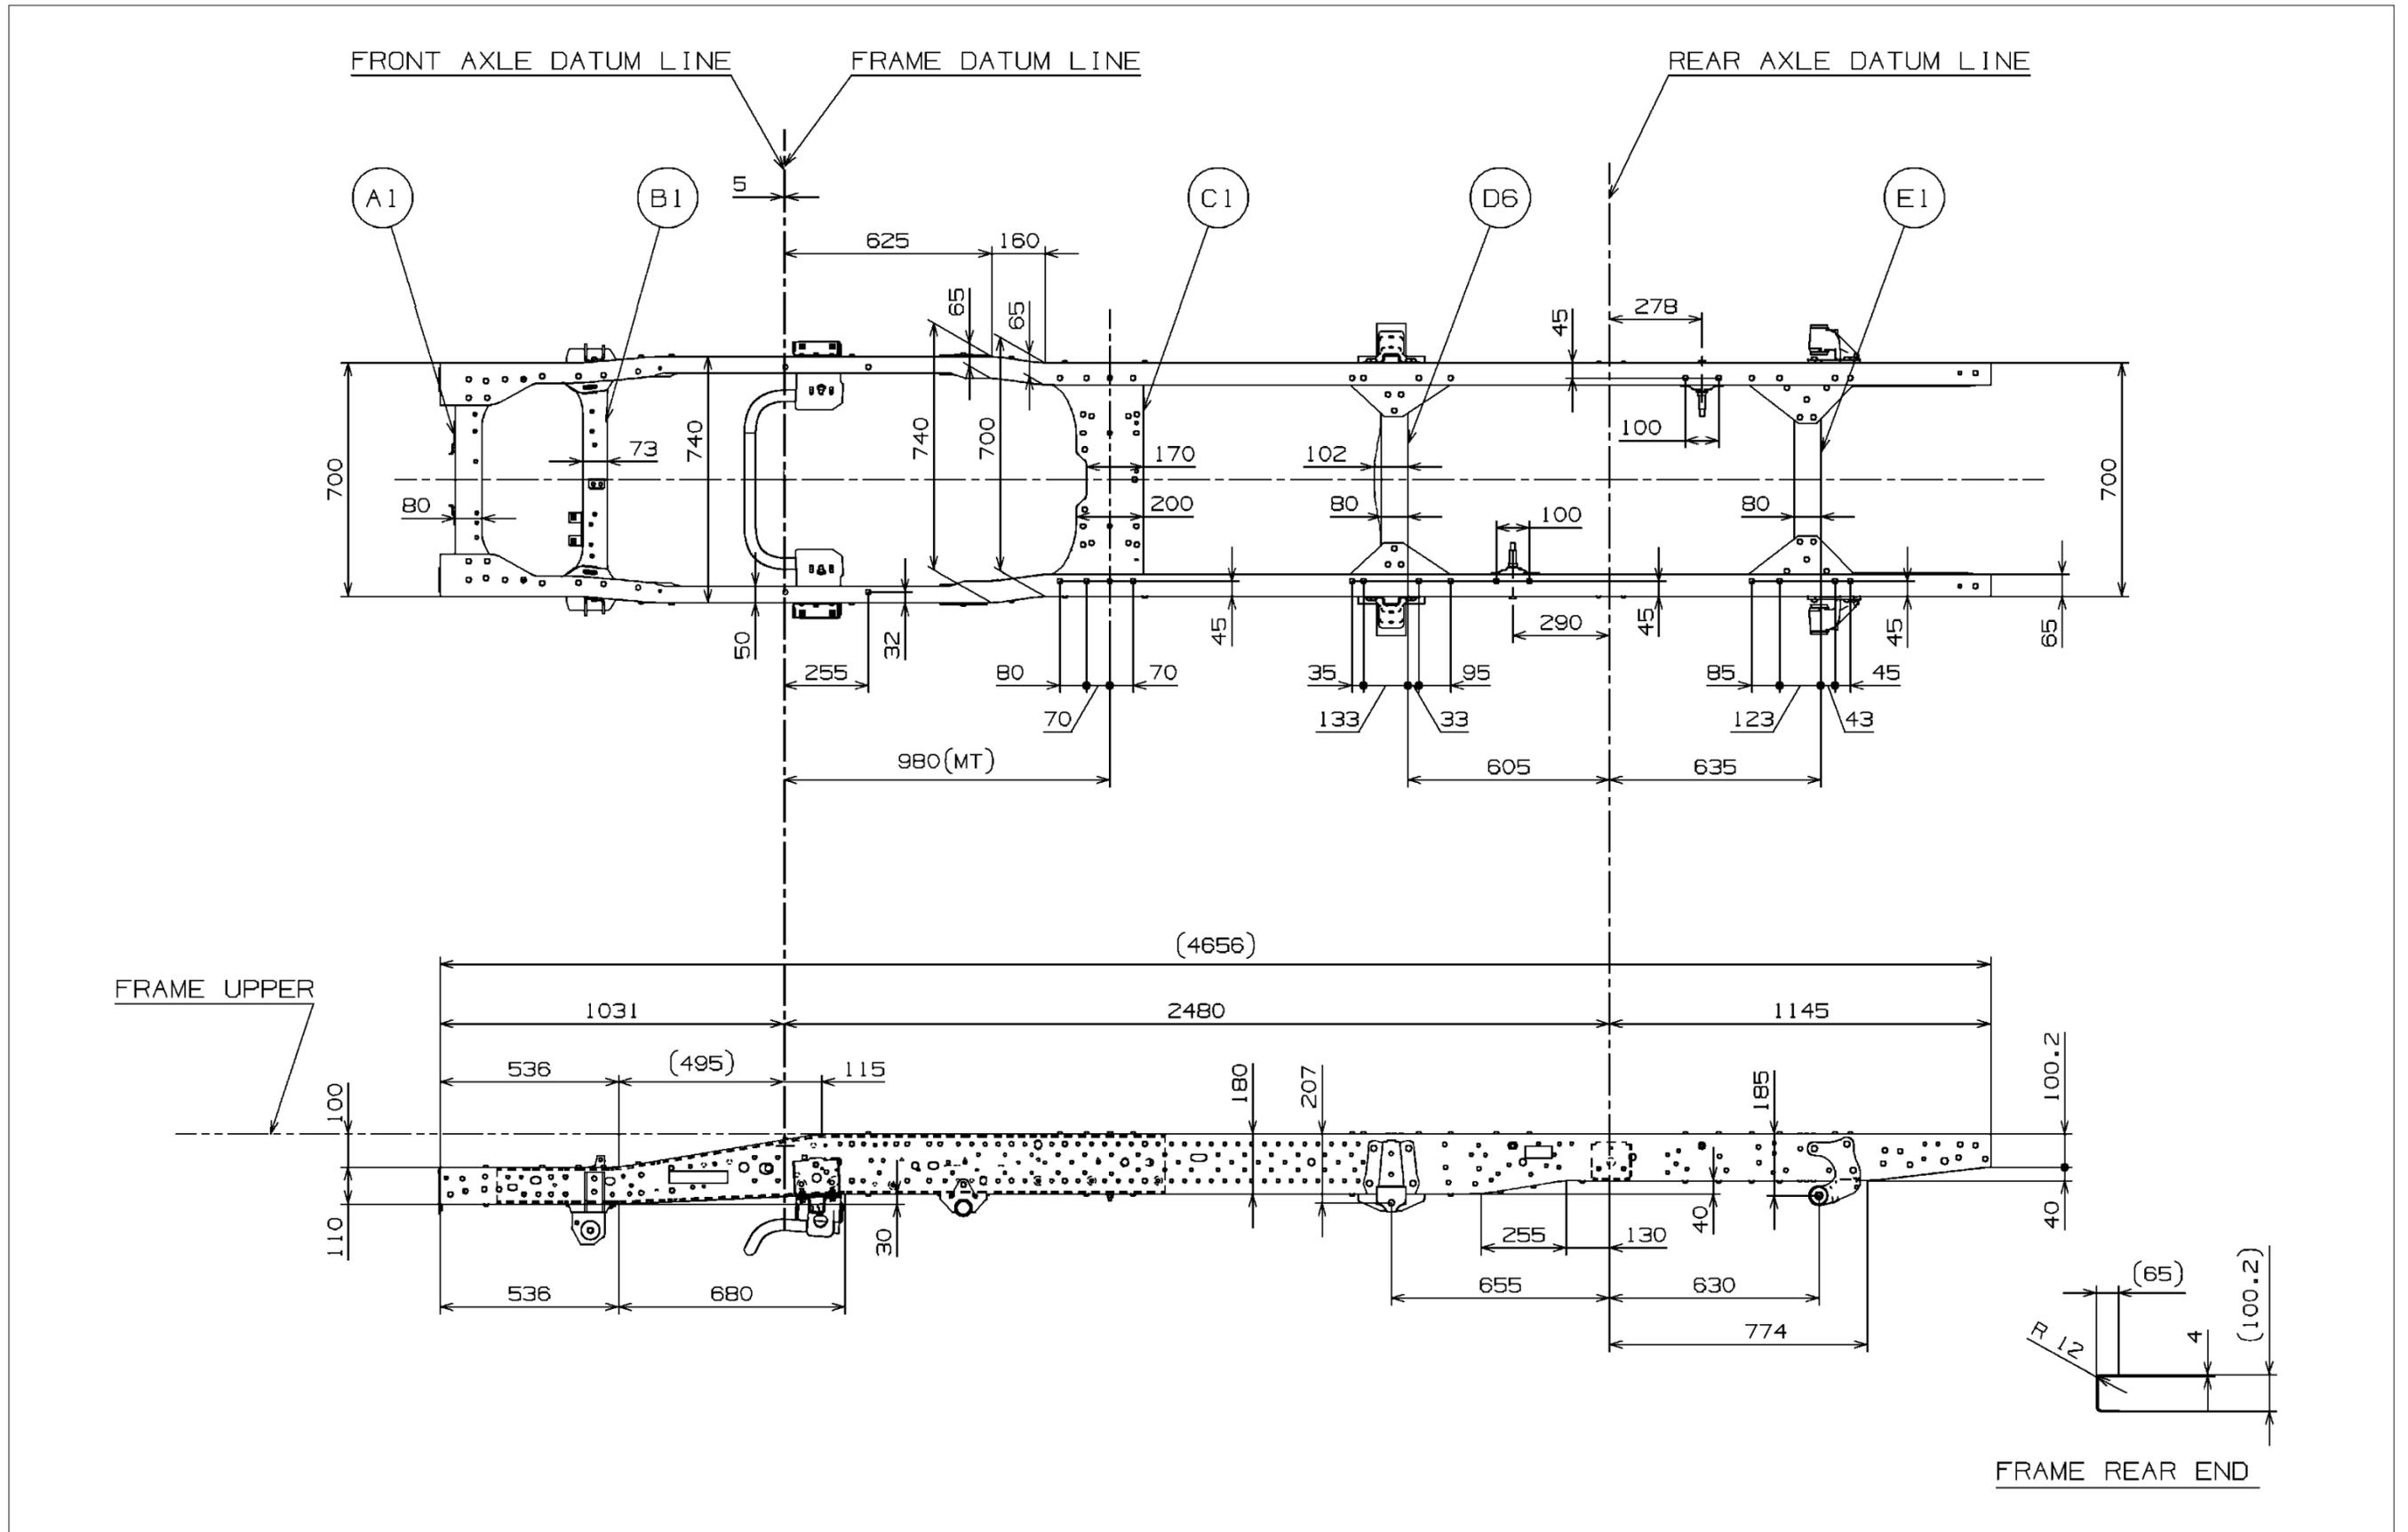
Chassis Frame Drawing NMR85L/U-HH5AYEN
